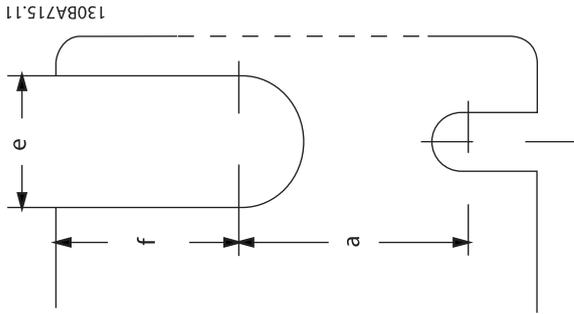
Top and bottom mounting holes. (B4+C3+C4 only)
